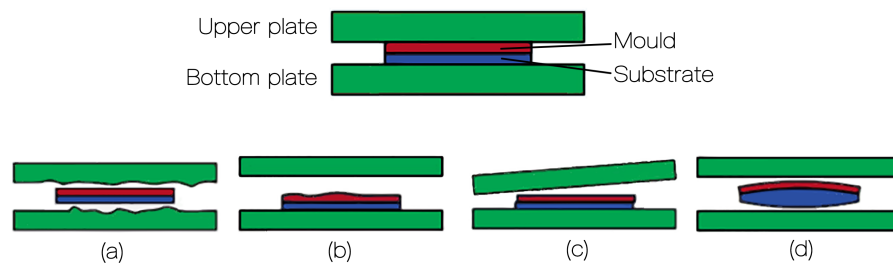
A schematic diagram of the solid parallel-plate mechanical press nano-imprint method and potential drawbacks: (a) failure due to surface imperfections, (b) failure due to uneven mould/substrate backside, (c) failure due to non-parallelism, and (d) failure due to curved sample surfaces. [23]
